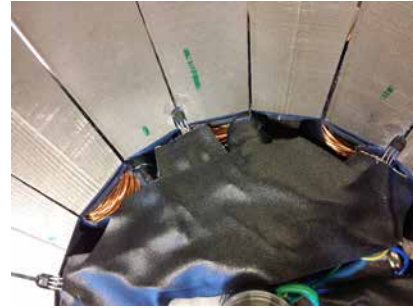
Hall sensors on the stator surface of the ferrite magnet SAT PMLDC motor for rotor position sensing.
